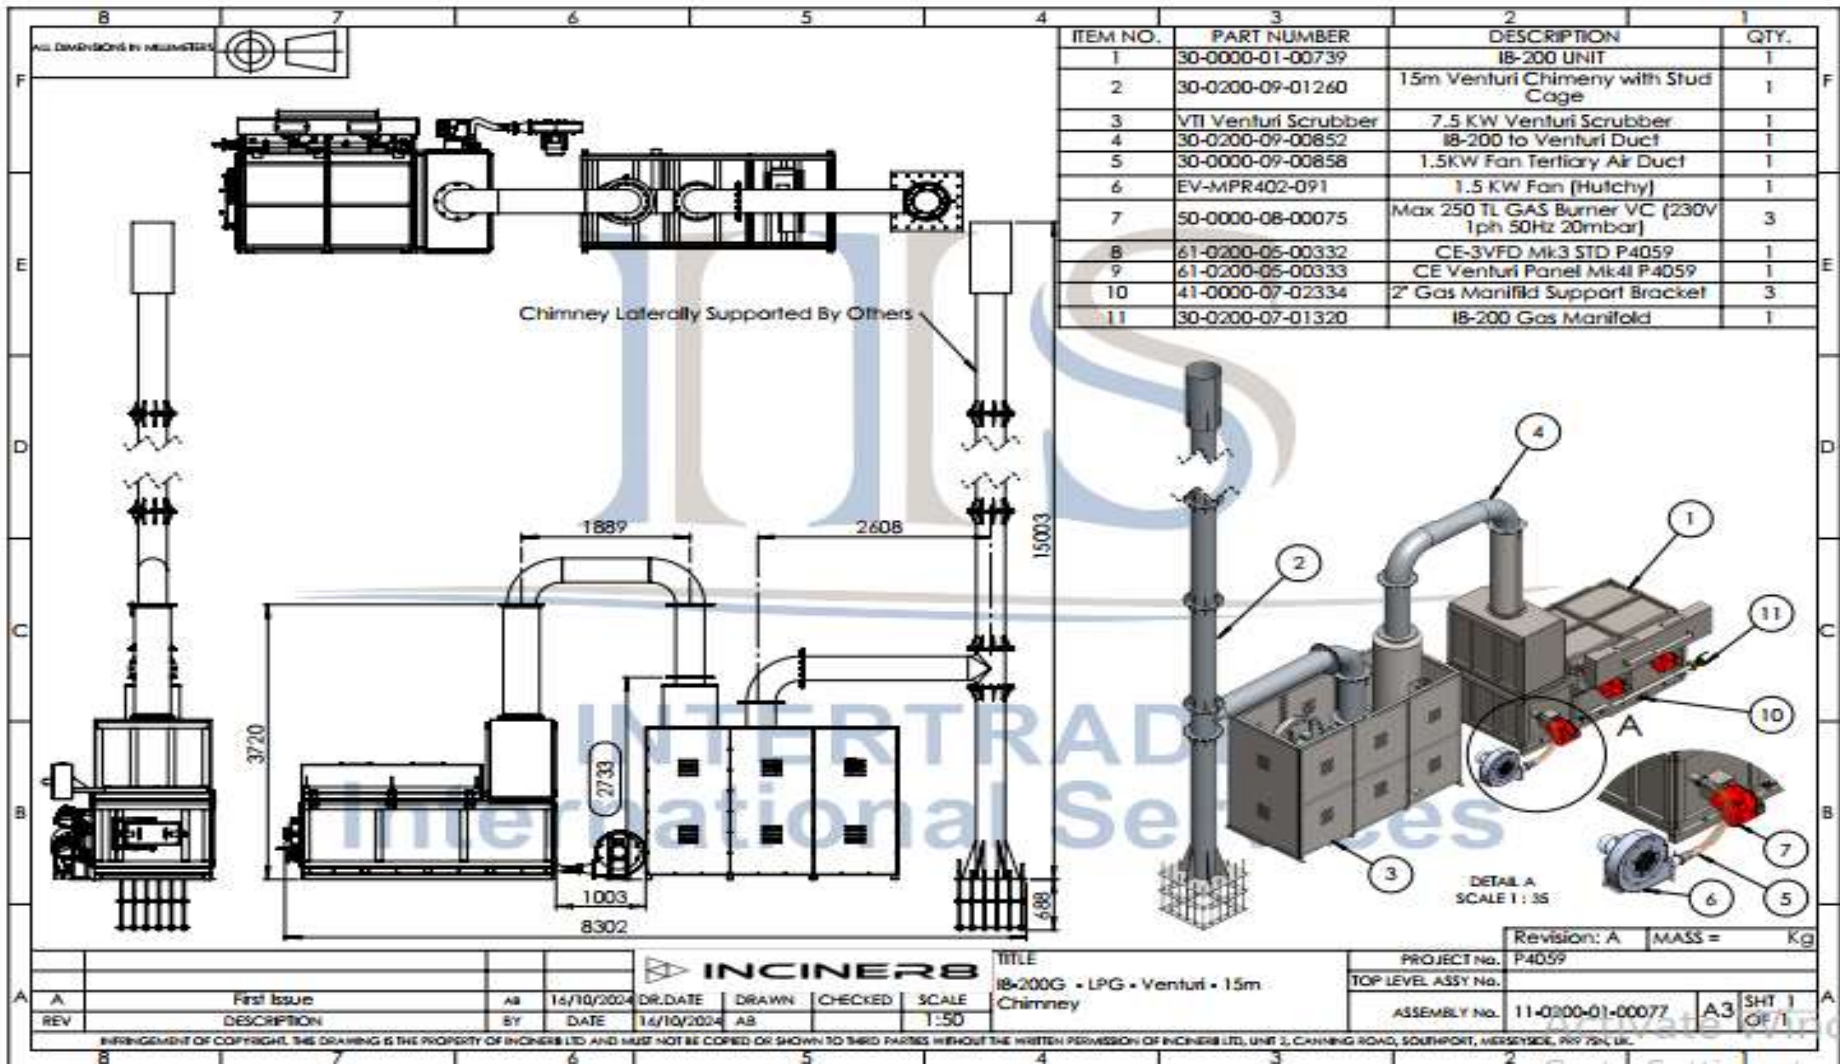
Proposed Plan layout of Incinerator i8-200G
